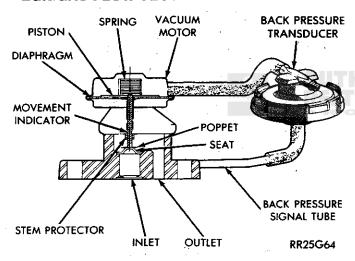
EGR and Back Pressure Transducer Assembly—Typical
